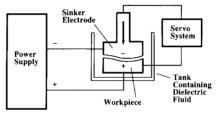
Sinker or Plunge Type EDM Machines Are Used to Sink Cavities in Molds and Dies
